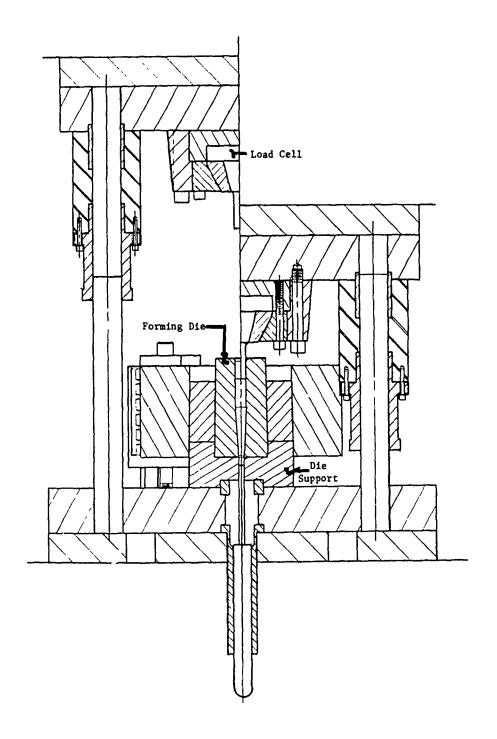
TOOLING FOR EXTRUSION-FORGING(5)
